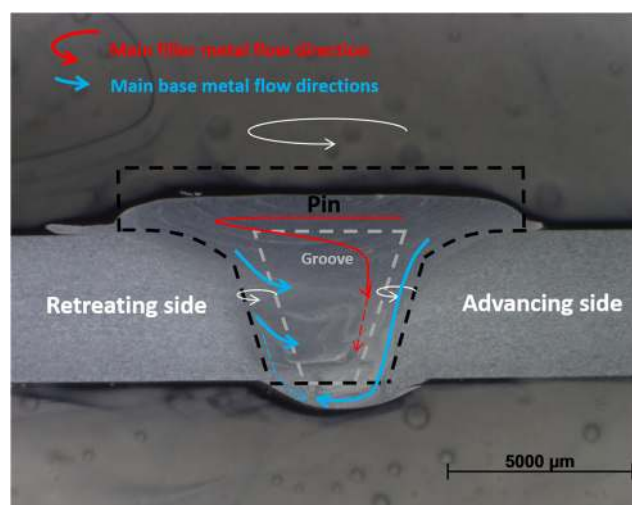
Illustration of the rotating pin and its location in the groove during HYB butt welding of plates
